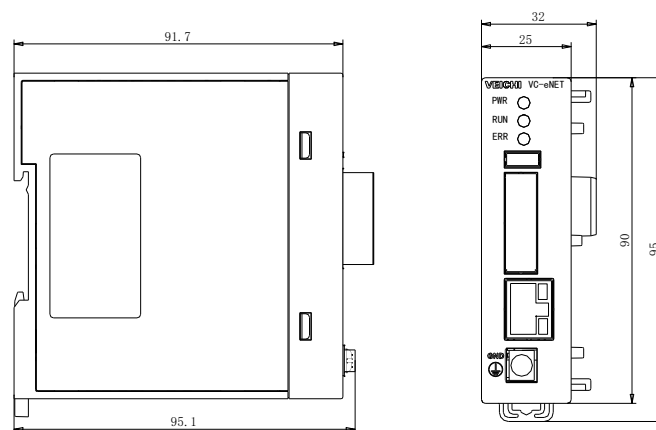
External dimensions and mounting hole size (unit: mm)
